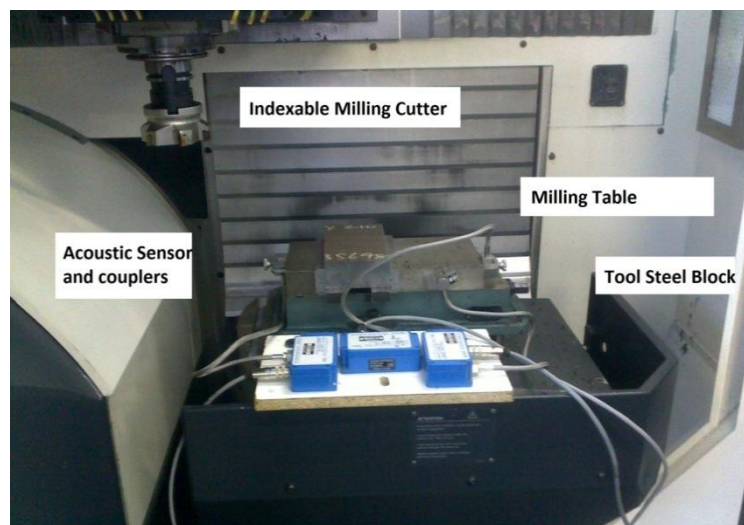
Machining setup of H13 tool steel and sensor positions
